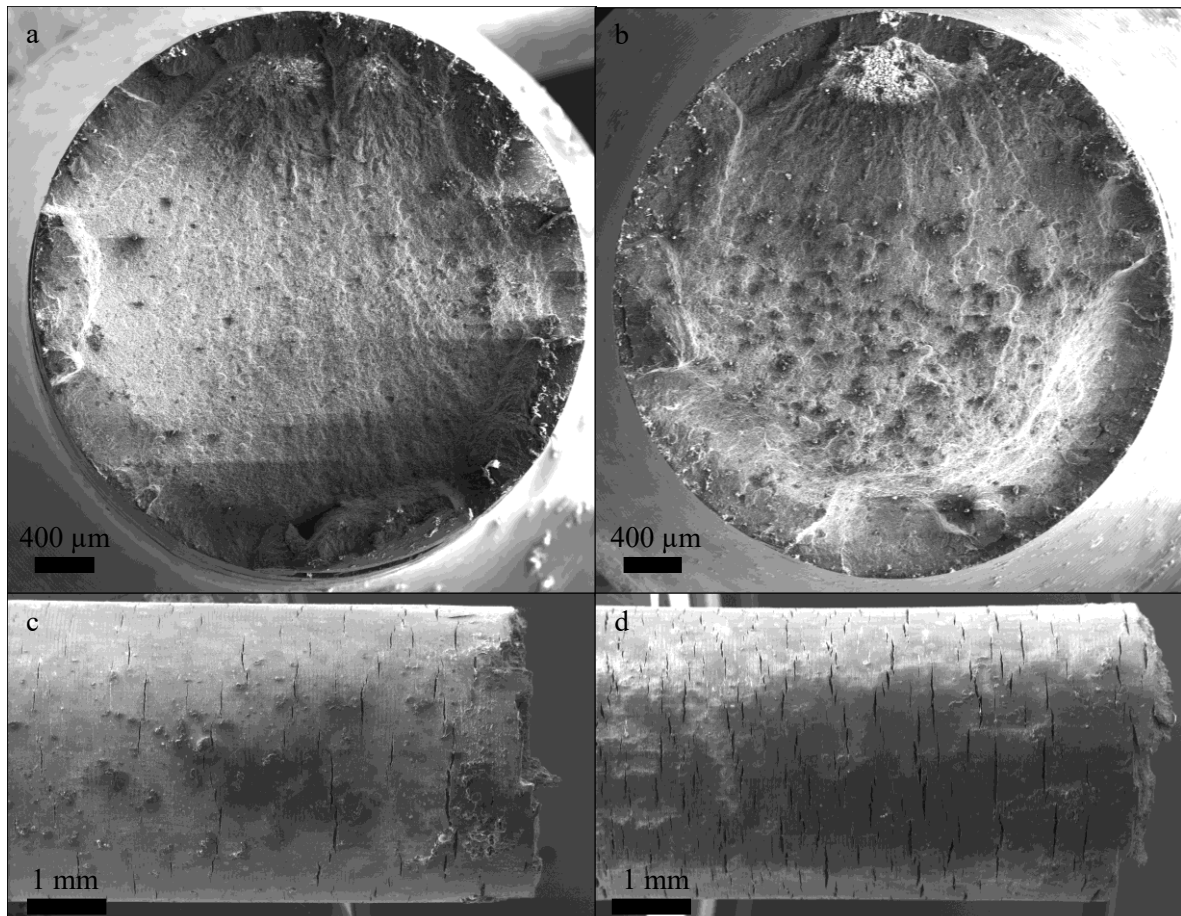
SEM images of uncoated SSRT tested specimens. Fracture surface of specimen tested at v2 (a). Fracture surface of specimen tested at v3 (b). Side view of specimen tested at v2 (c). Side view of specimen tested at v3 (d).
